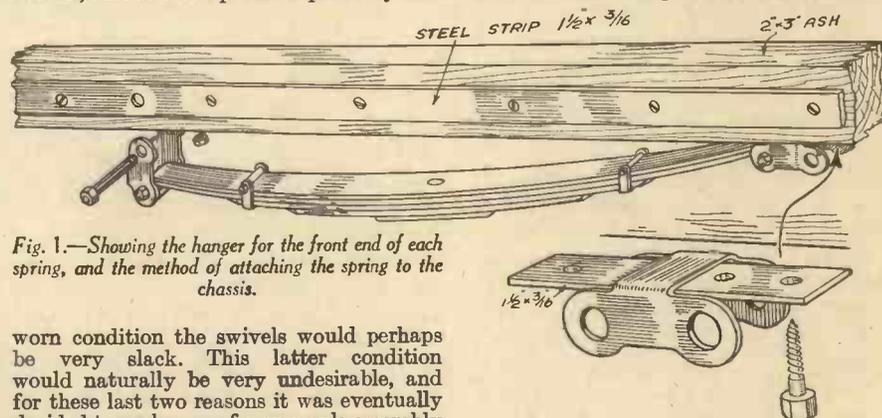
Showing the hanger for the front end of each spring, and the method of attaching the spring to the chassis.
